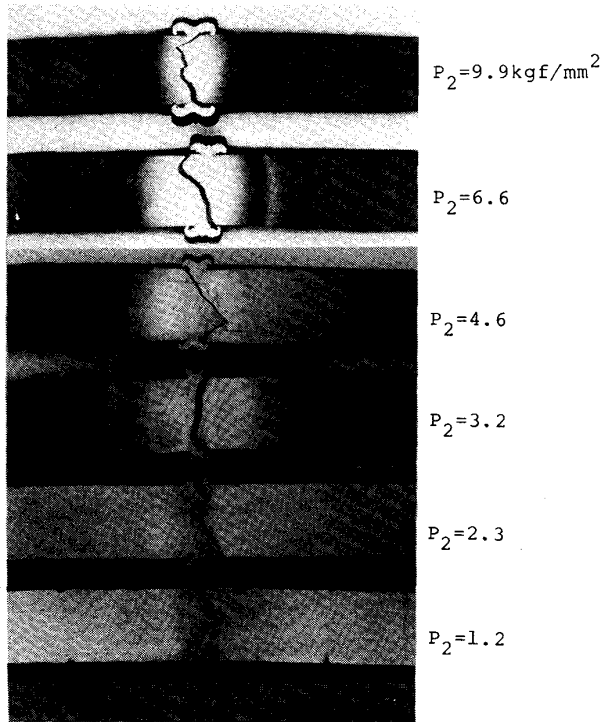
Appearance of fractured bending test specimens with burr ($t_1=4.2$ s, $P_1=0.76$ kgf/mm², $t_2=5.5$ s).
